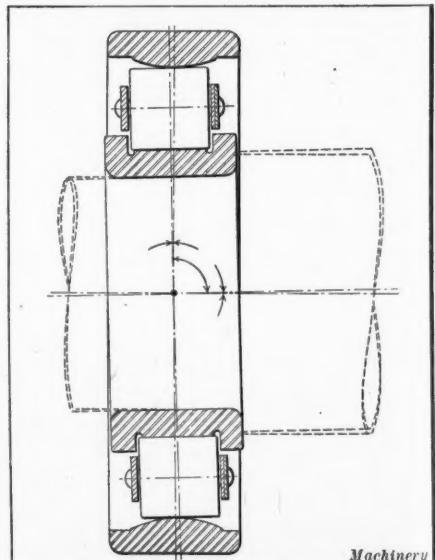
Radial Roller Bearing provided with Means of compensating for Lack of Shaft Alignment
